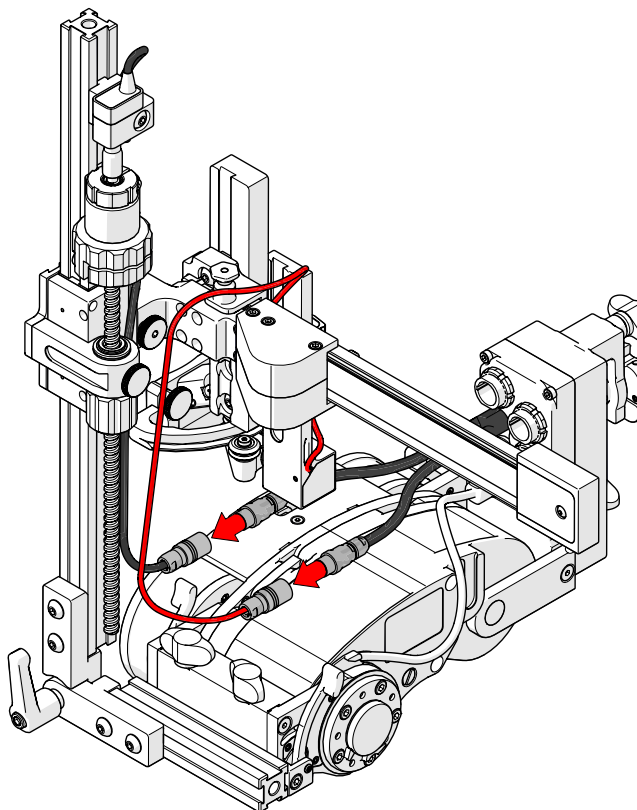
Connect encoder cables to 3-axis encoder cable
